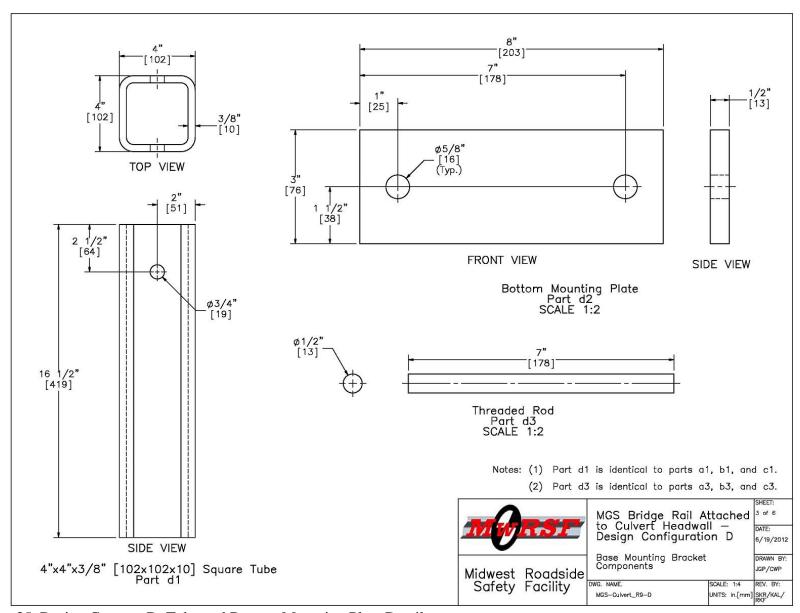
Design Concept D, Tube and Bottom Mounting Plate Details
